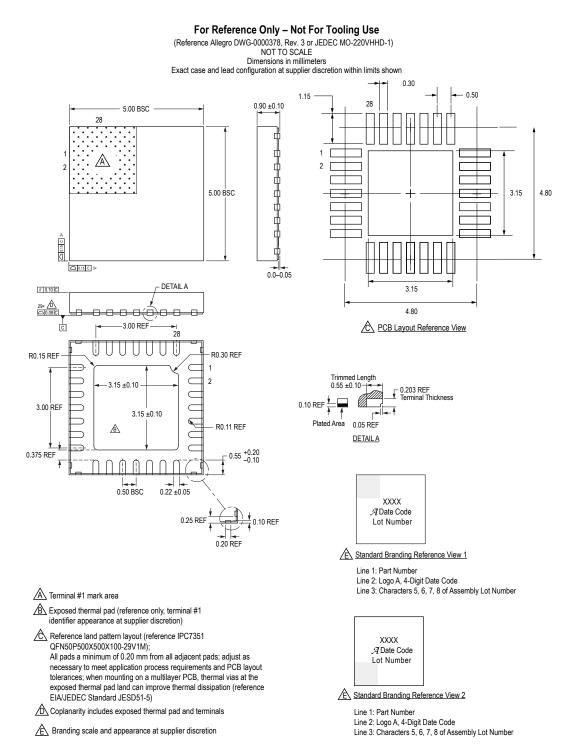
Package ET, 28-Contact QFN with Exposed Pad
